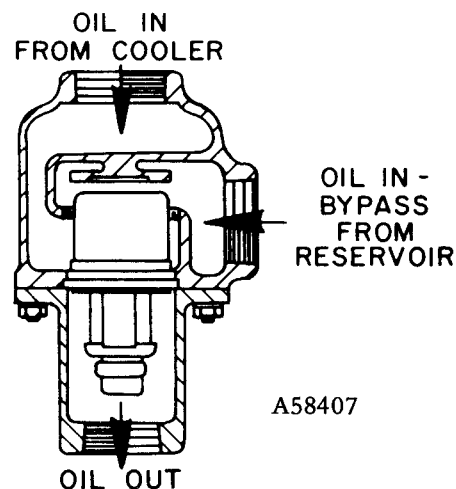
A. – THERMOSTATIC MIXING VALVE
